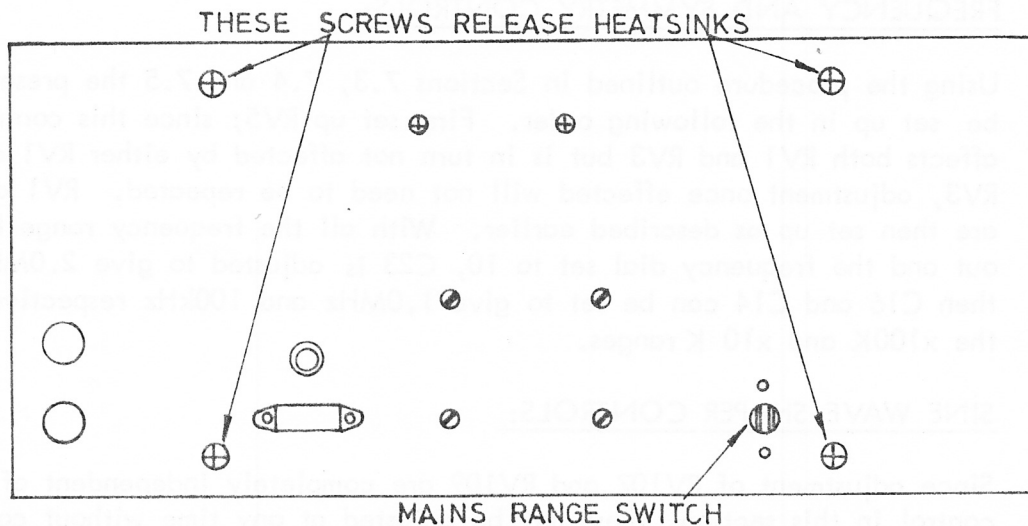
Rear Panel showing location of Heat sink securing screws.
